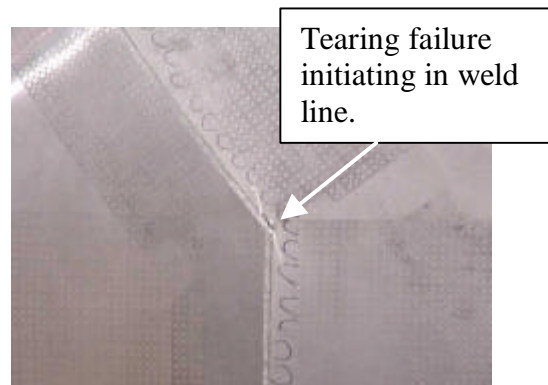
CLOSE UP VIEW OF FAILURE INITIATING IN THE WELD LINE AND PROPAGATING INTO THE THINNER MATERIAL AT A DEPTH OF 79-MM WITH A TRADITIONAL FORMING PROCESS.
